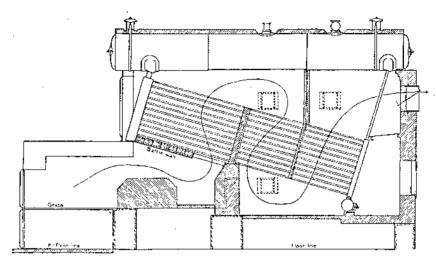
Ideal Section Showing Additional Baffle Wall and an Elongated Fire Box.
